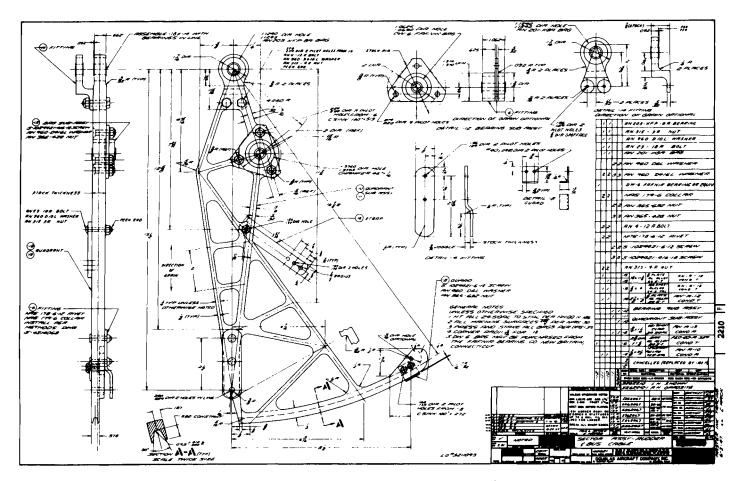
Communication: a typical example of a conventional engineering design detail drawing
